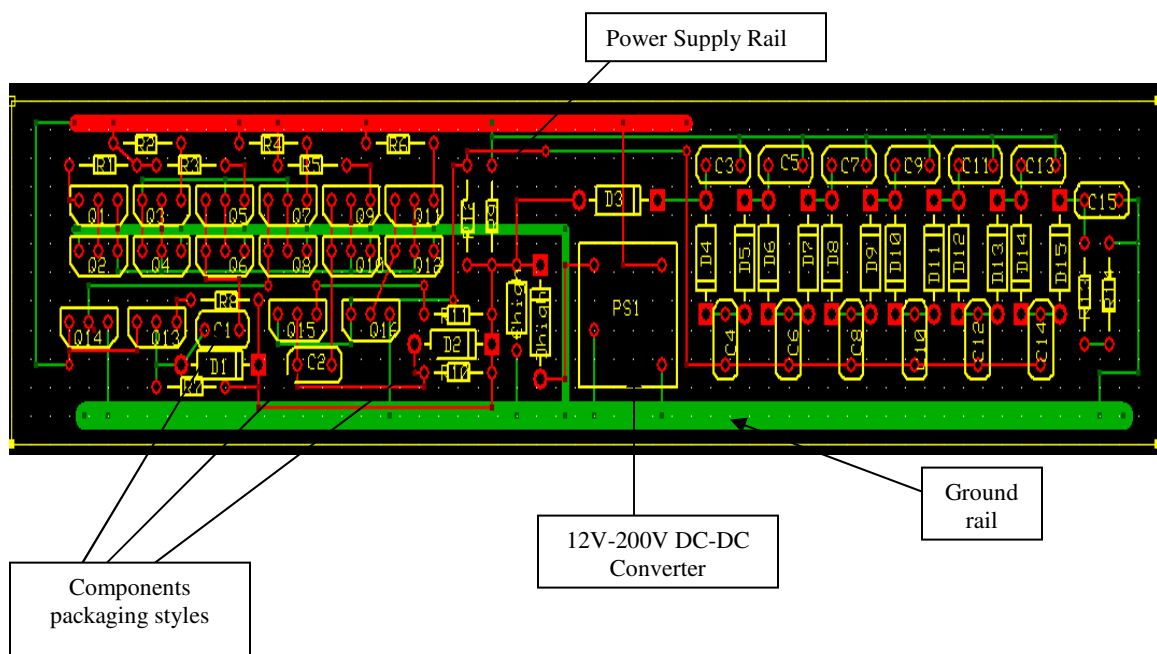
Layout of the Printed Circuit Board (PCB).
